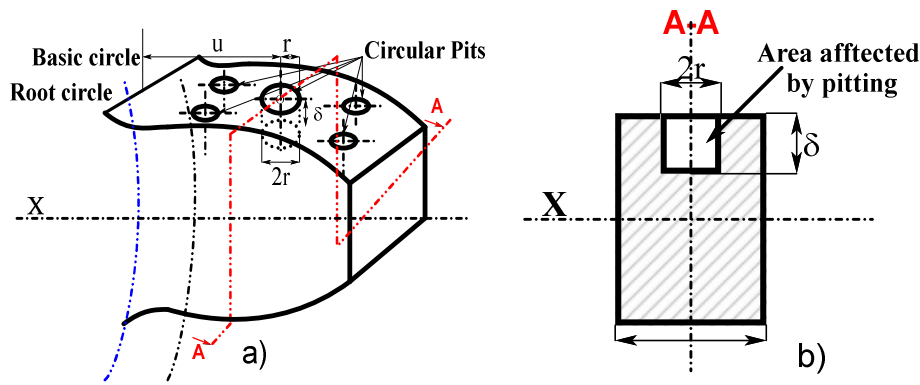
Gear tooth with holes: a) 3D perspective view of the profile and b) Cross section of the tooth.
